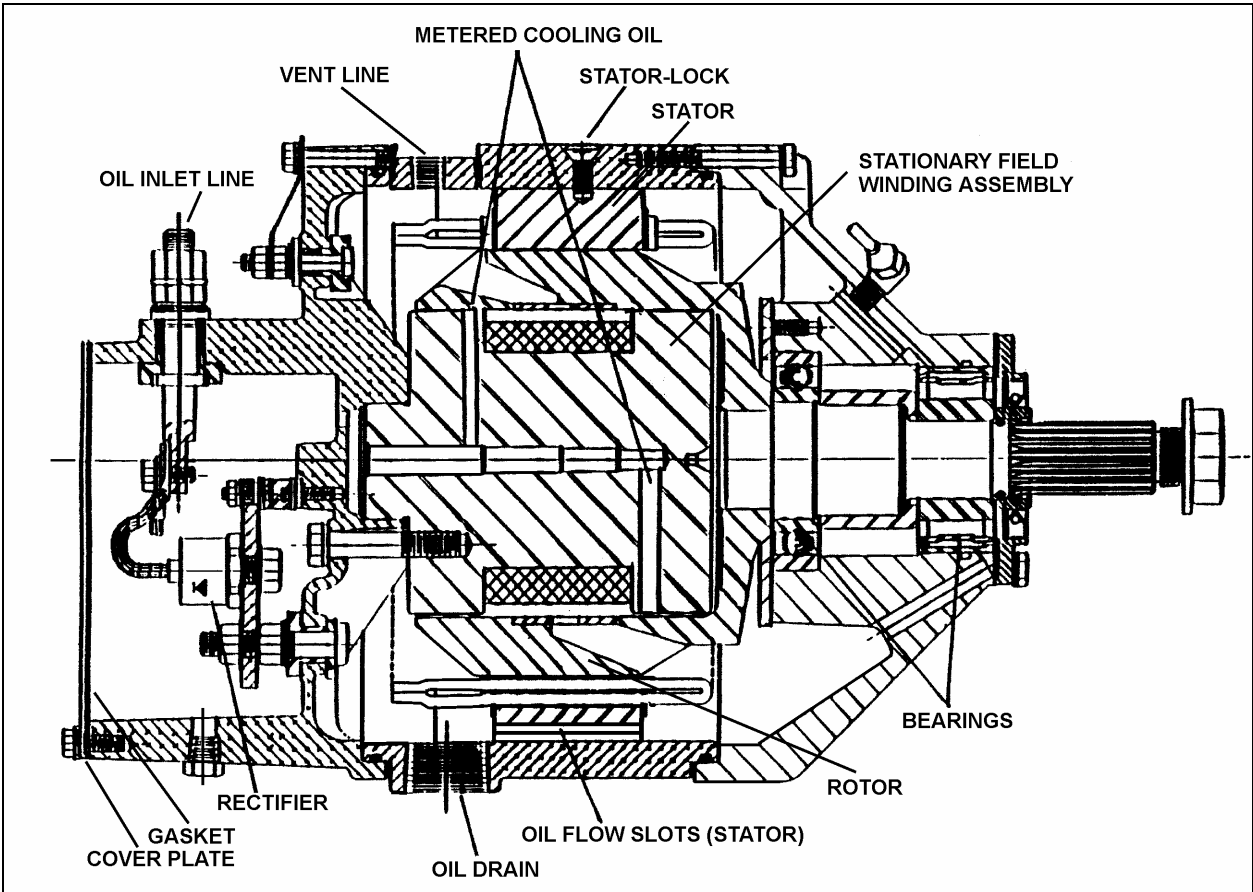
50DN DELCO ALTERNATOR SECTIONAL VIEW
